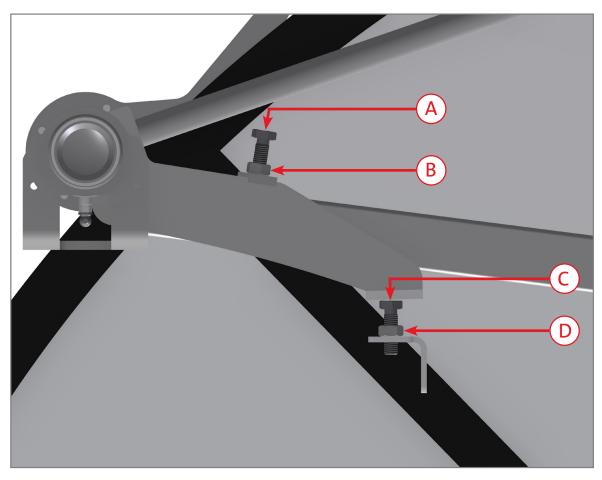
Screw and nut for adjustment of rinse header position and rinse header safety stop
